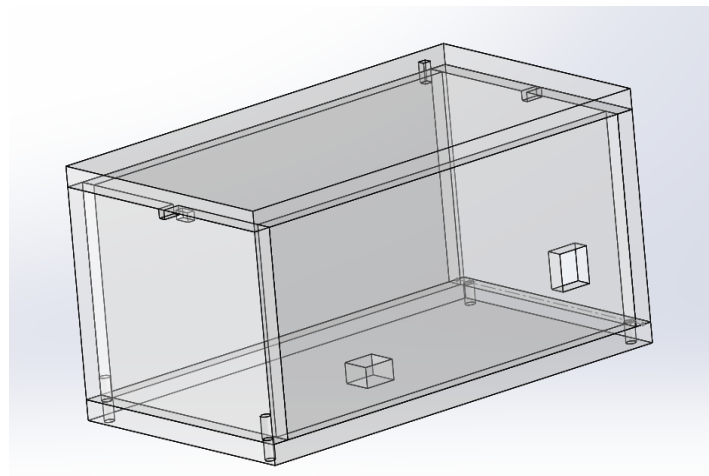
CAD Drawing of Wilson Acrylic Enclosure
